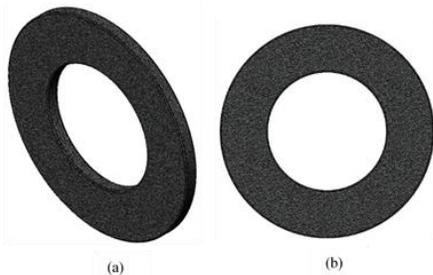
(a) Isometric View of Friction Lining (b) Front View of Friction Lining
